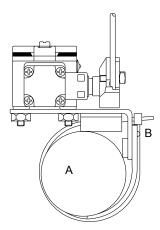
Lynx™ Mold-Closed Limit Switch front view
